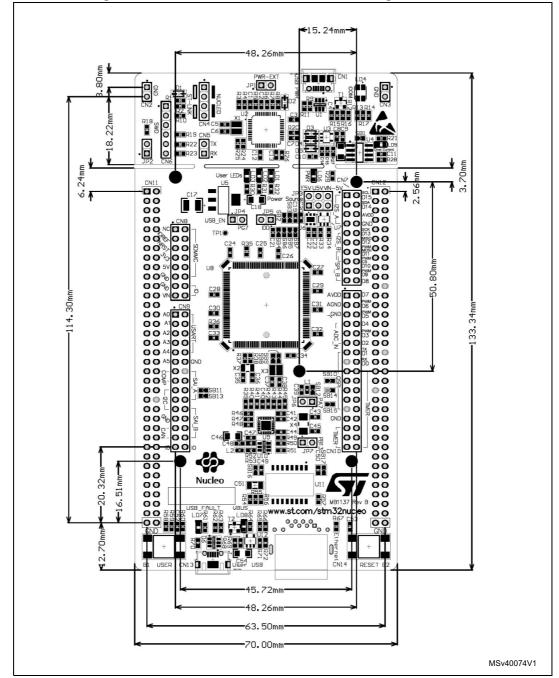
Nucleo-144 board mechanical drawing in millimeter
